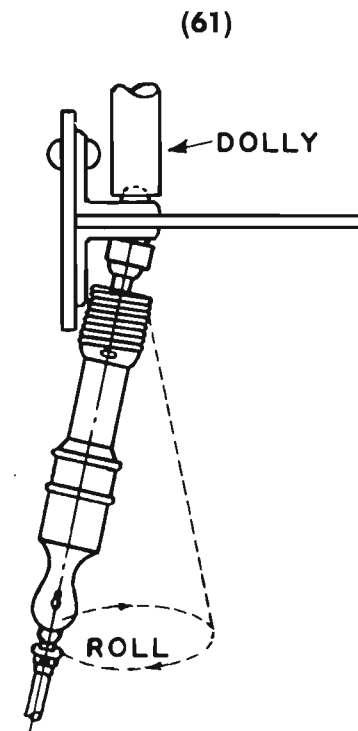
Positions of pneumatic hammer and dolly in driving rivets.
